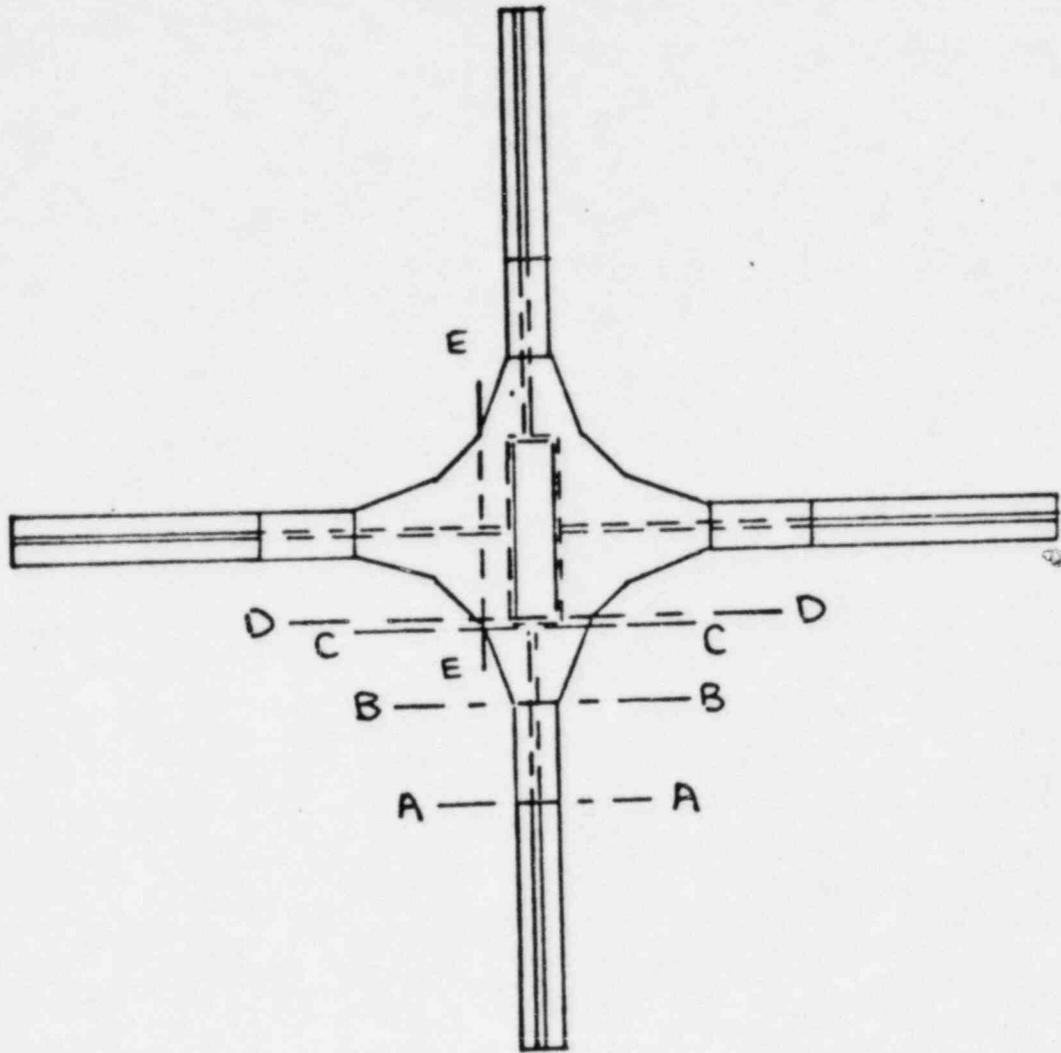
RPV HEAD STRONGBACK SECTION LAYOUT
